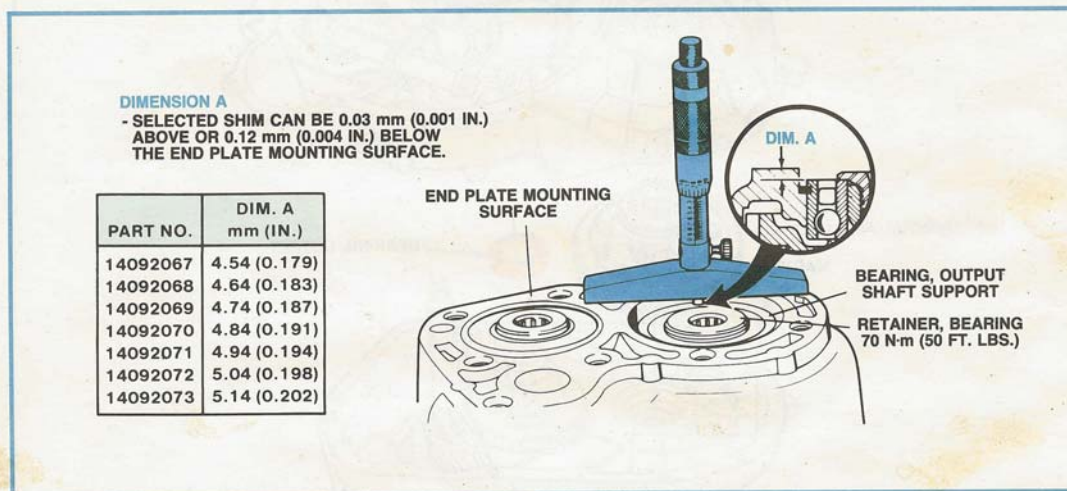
, Output Shaft Support Bearing Selective Shim Procedure.
